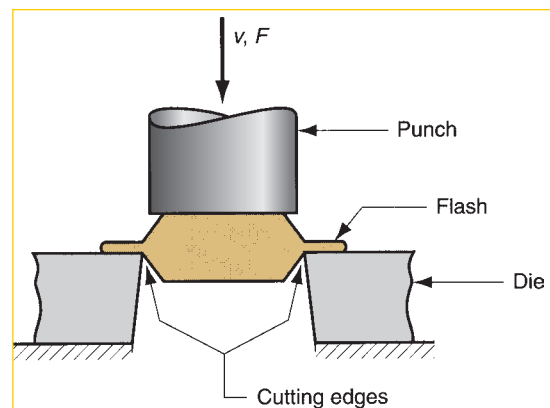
Trimming operation (shearing process) to remove the flash after impression-die forging.
